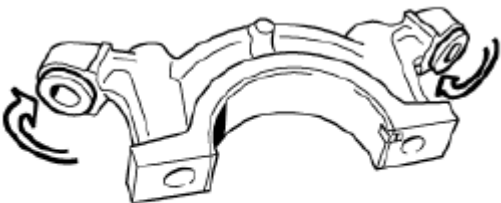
Identifying Thrust Bearing Stop Disk Surface
